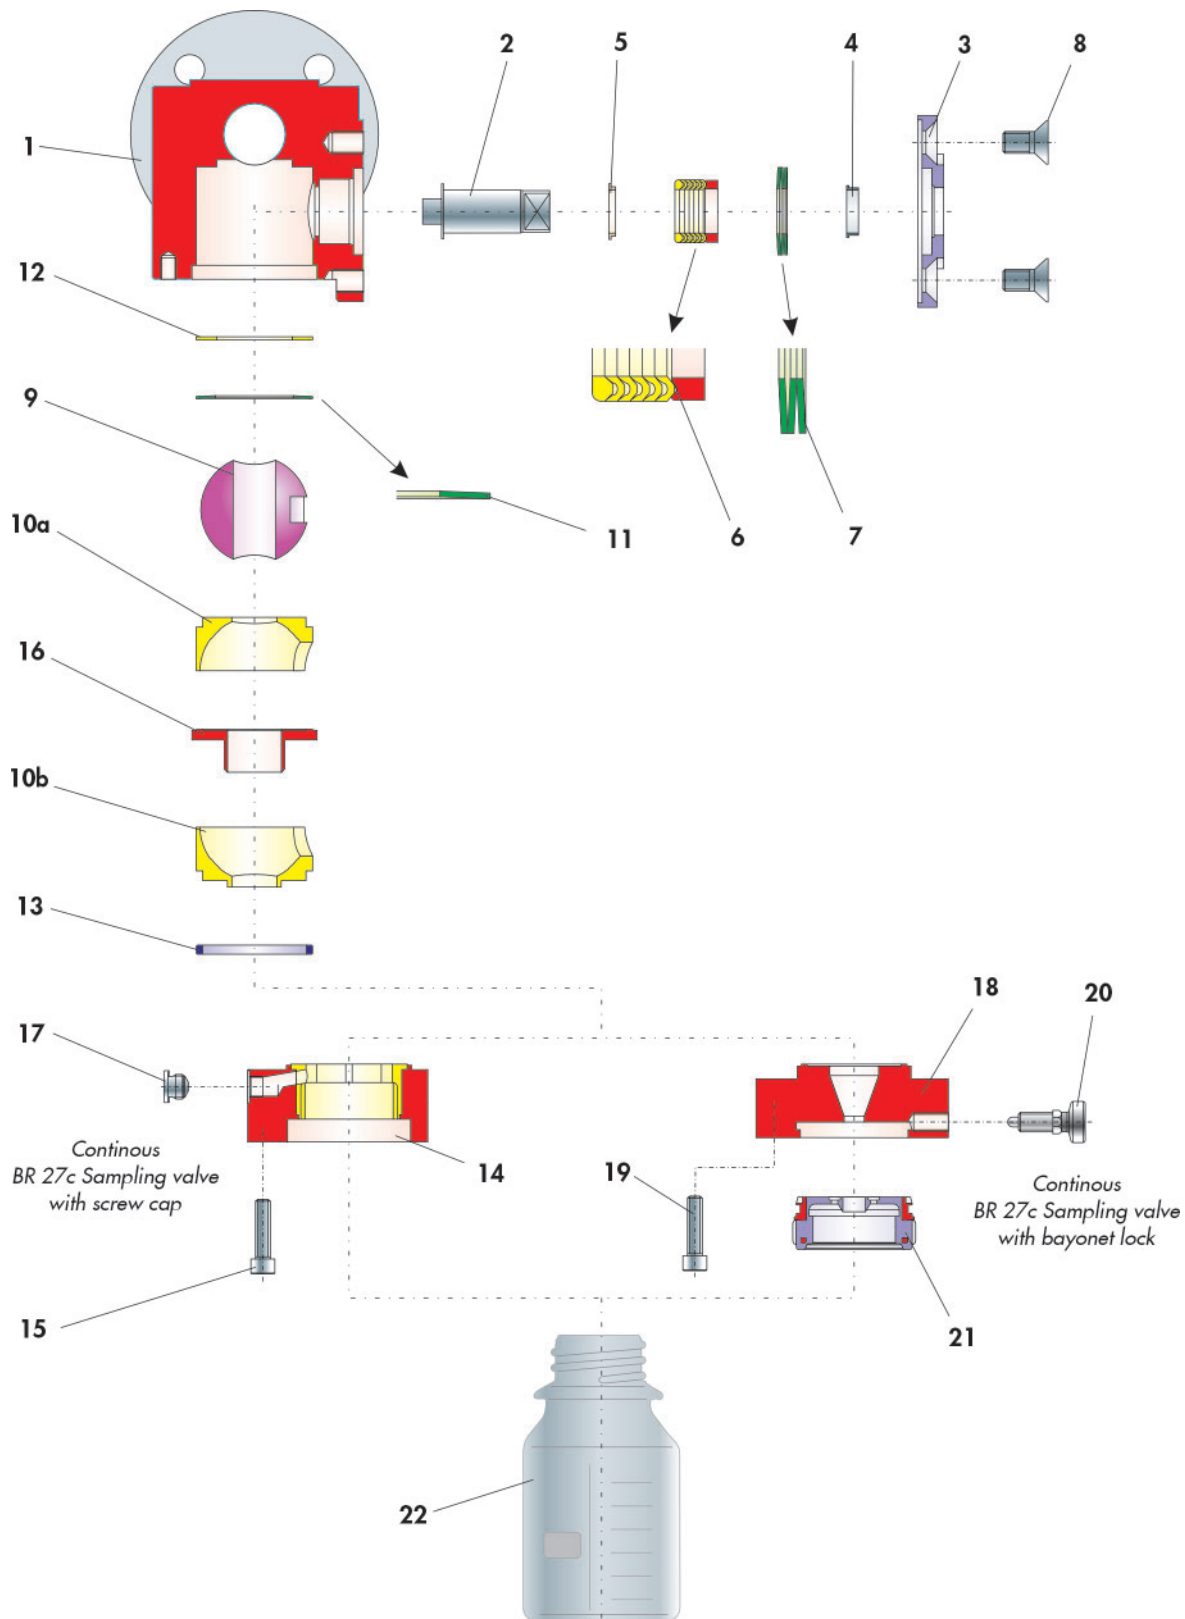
Exploded drawing of the BR 27a Sampling valve
